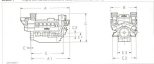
Engines with standard accessory equipment, including mounting and large mounted gearbox
